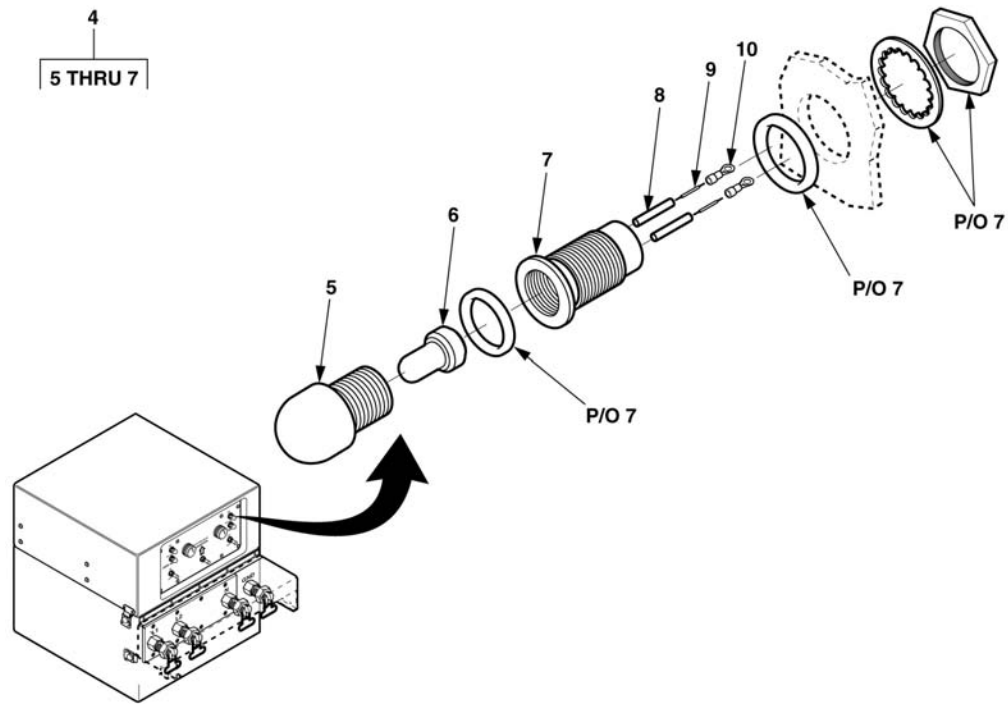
Lights/Lamps Assembly, 97403 13229E5764-2
